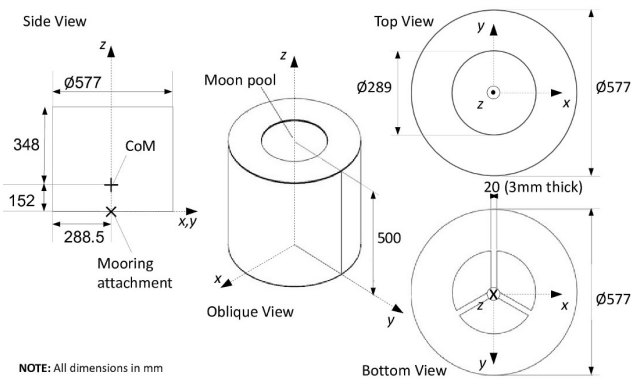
Sketch of the geometry and dimensions of a cylinder with moon-pool. CoM: Centre of Mass [7].
